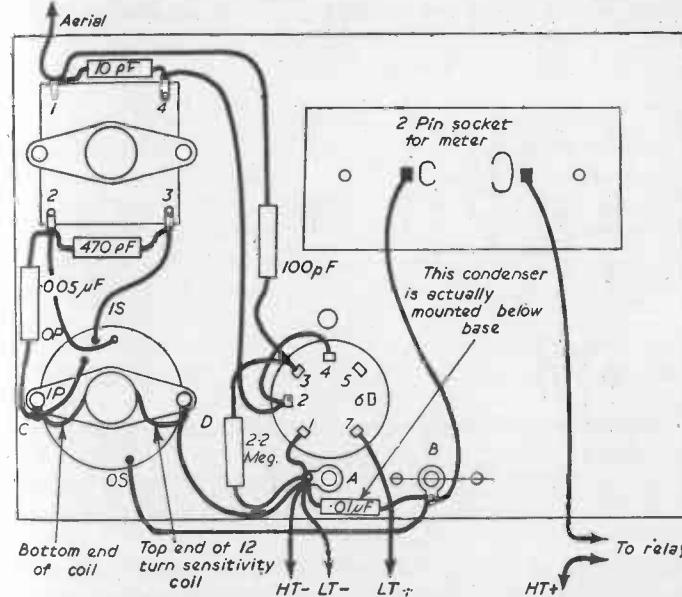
Wiring diagram of single-valve model-control receiver. For clarity, the valveholder is shown mounted flat. Note that this drawing shows the quench coil leads as being brought out through holes. The text describes an alternative, simple method using a radial slot.
